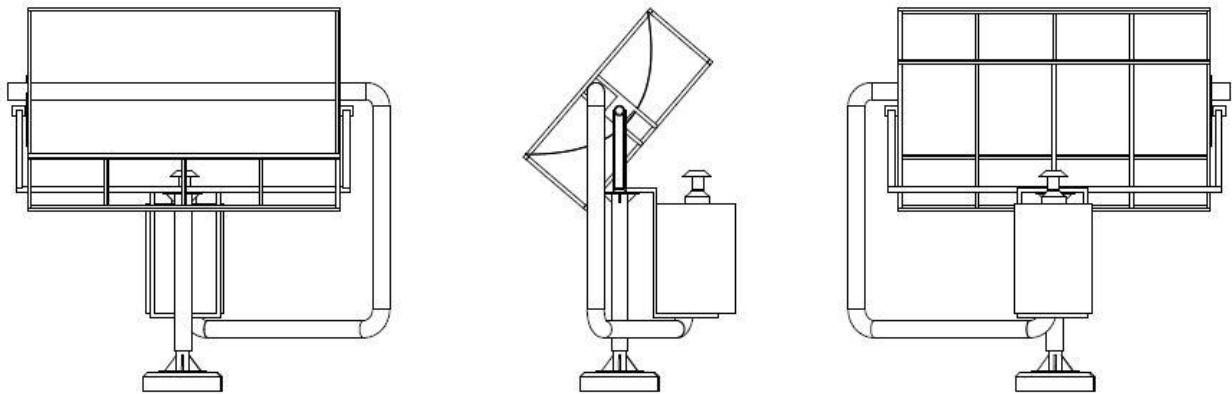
Drawing the 3D model and geometric projections of the new solar dryer prototype
